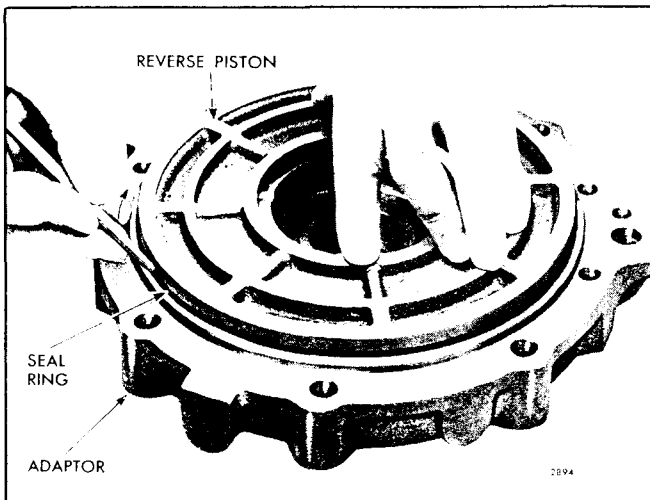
Installing Reverse Clutch Piston in Adaptor
